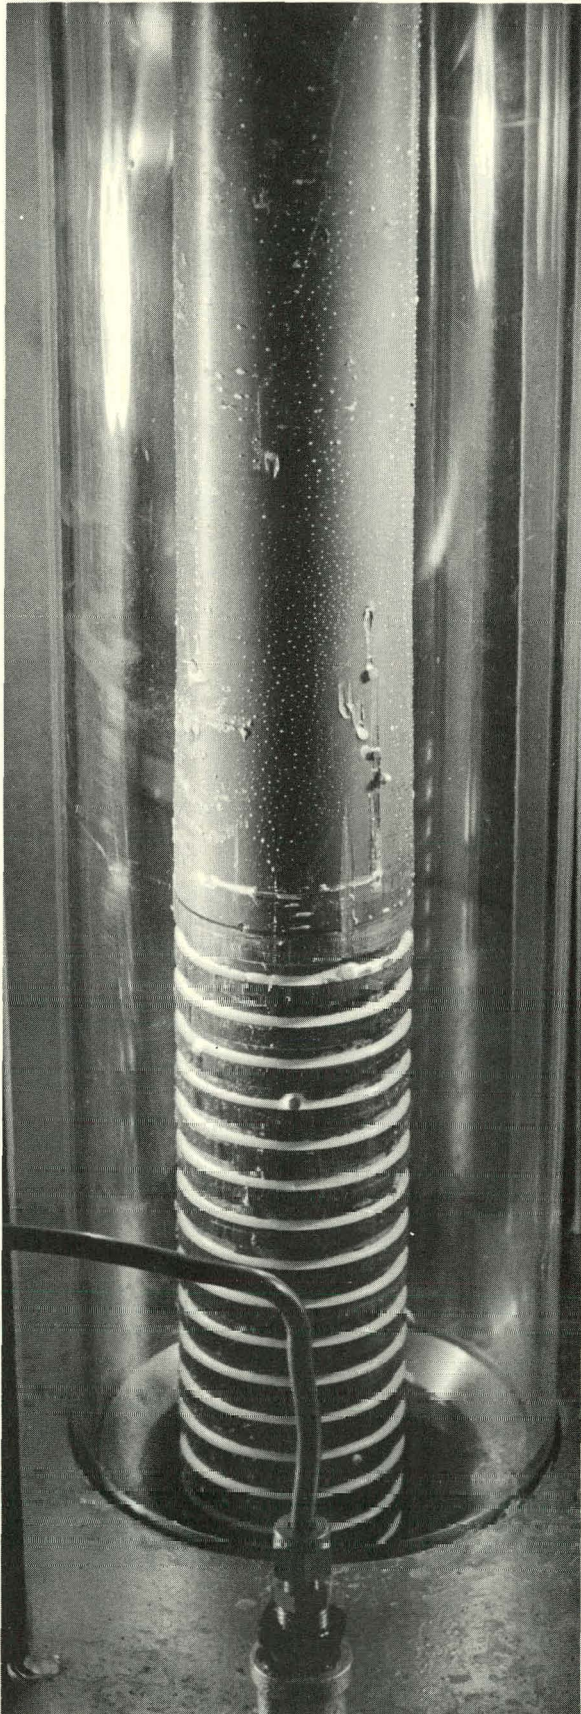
Steel balls and scoring on No. 7 control rod drive shaft just above labyrinth section
